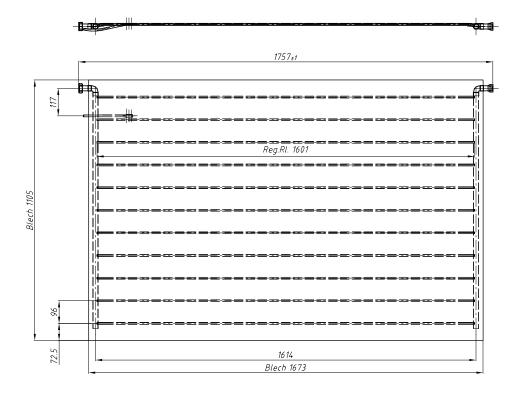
Drawing of absorber layout Collettore Solare Piano CP2M
